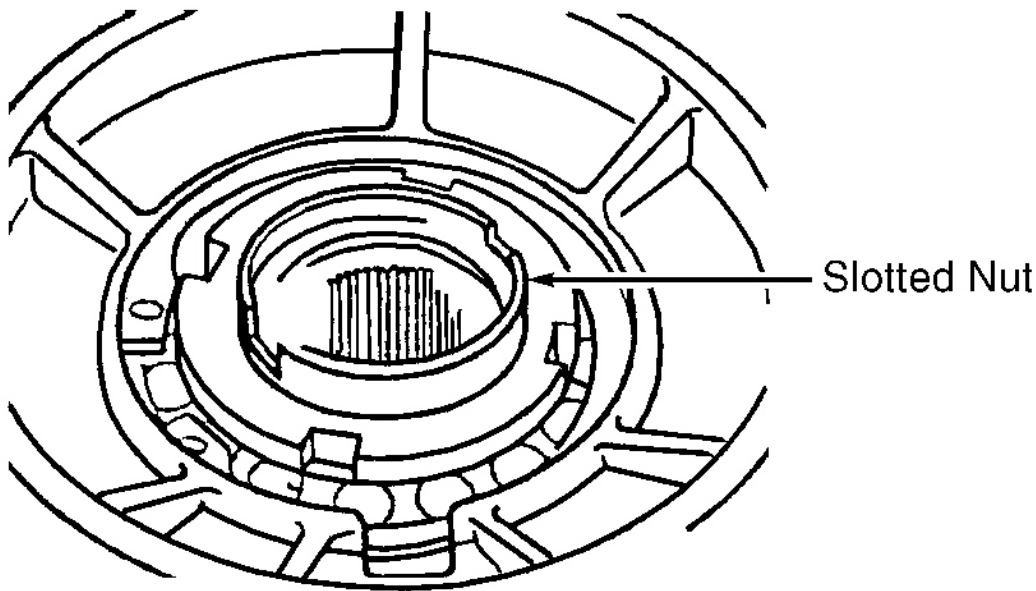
Checking Thrust Washers & Needle Bearing Installation
